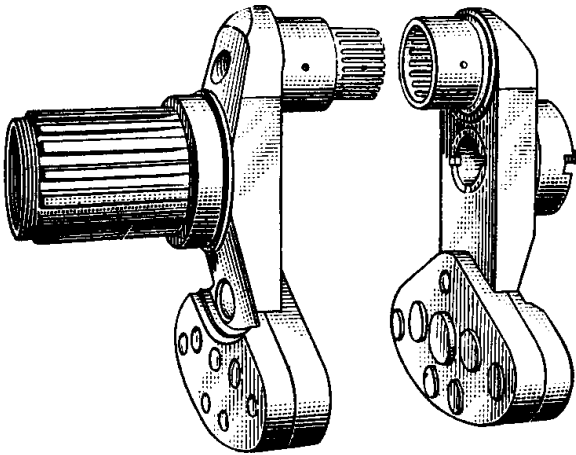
"Wasp" Crankshaft (Pratt & Whitney)
